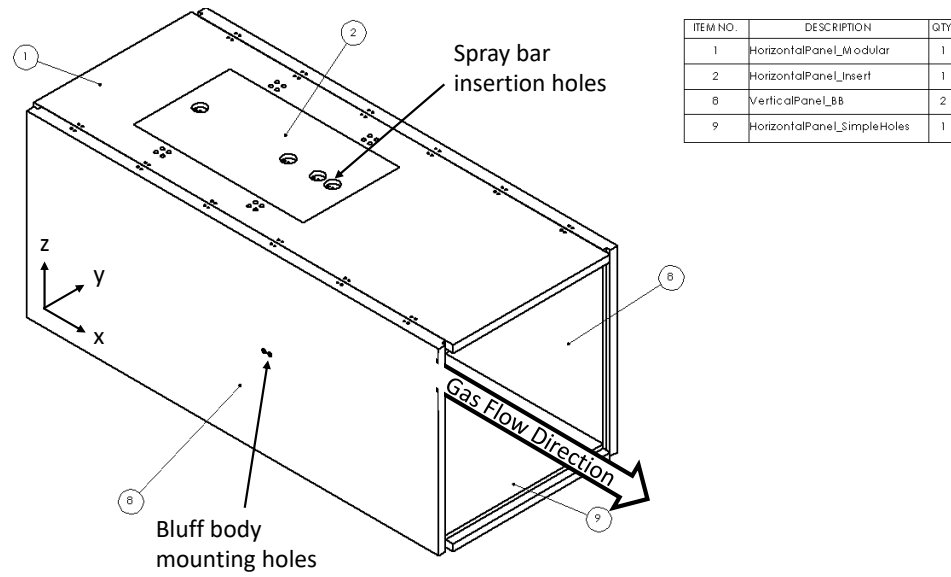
Isometric CAD drawing of the test section in the assembled configuration. The gas flow direction, the insertion holes for the spray bar, and the mounting holes for the bluff body are annotated for clarity. A parts list is also included identifying different panels of the test section.
